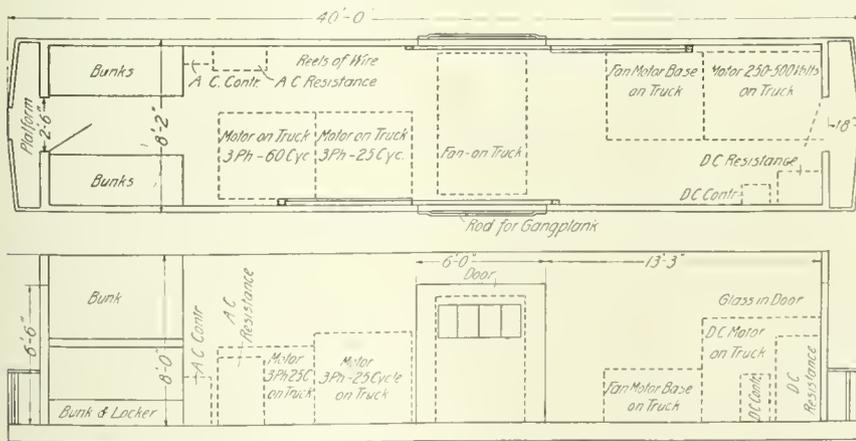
PLAN AND ELEVATION OF C. F. & I. CO., EMERGENCY CAR
